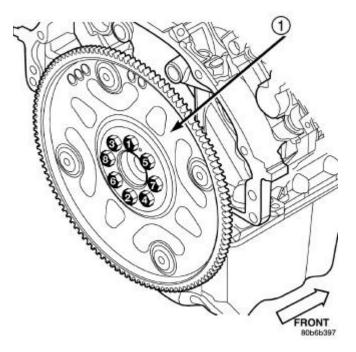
Flexplate Tightening Sequence Courtesy of CHRYSLER LLC
